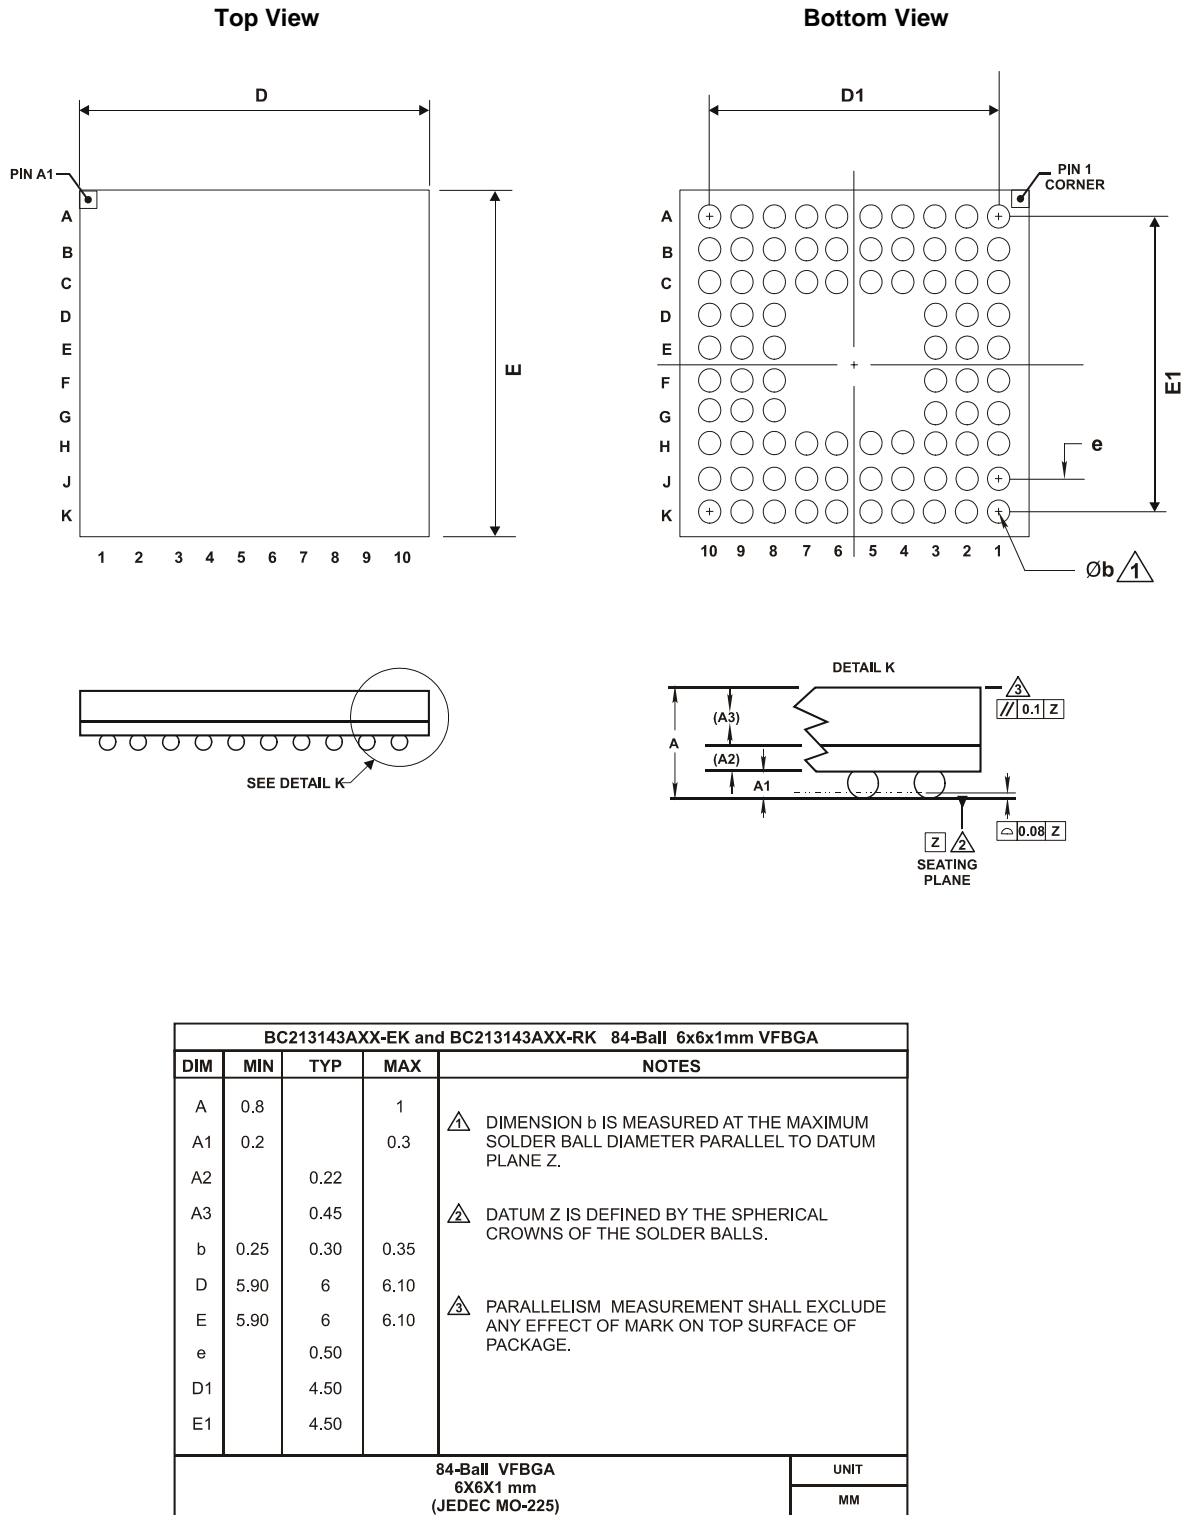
BlueCore2-ROM VFBGA Package Dimensions
